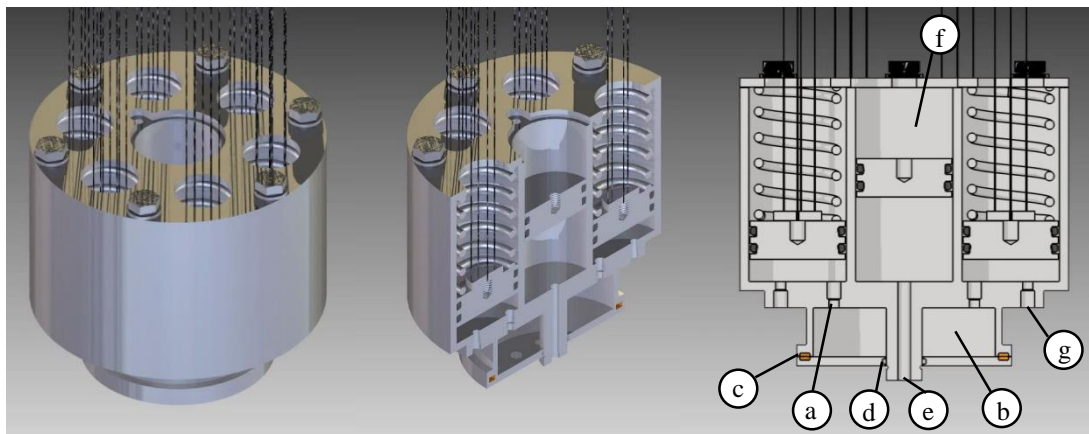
Final design for hydraulic pump using NiTi-wires
